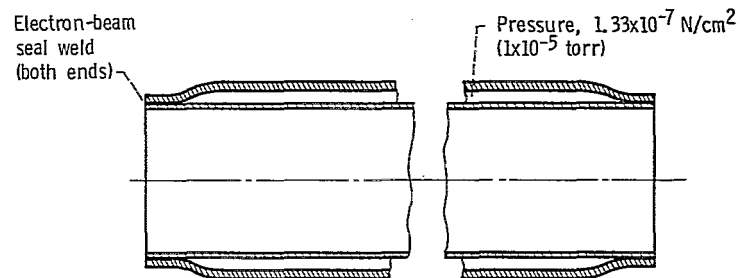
Vacuum insulator (typical) at mercury inlet end of tantalum header and tubes.
